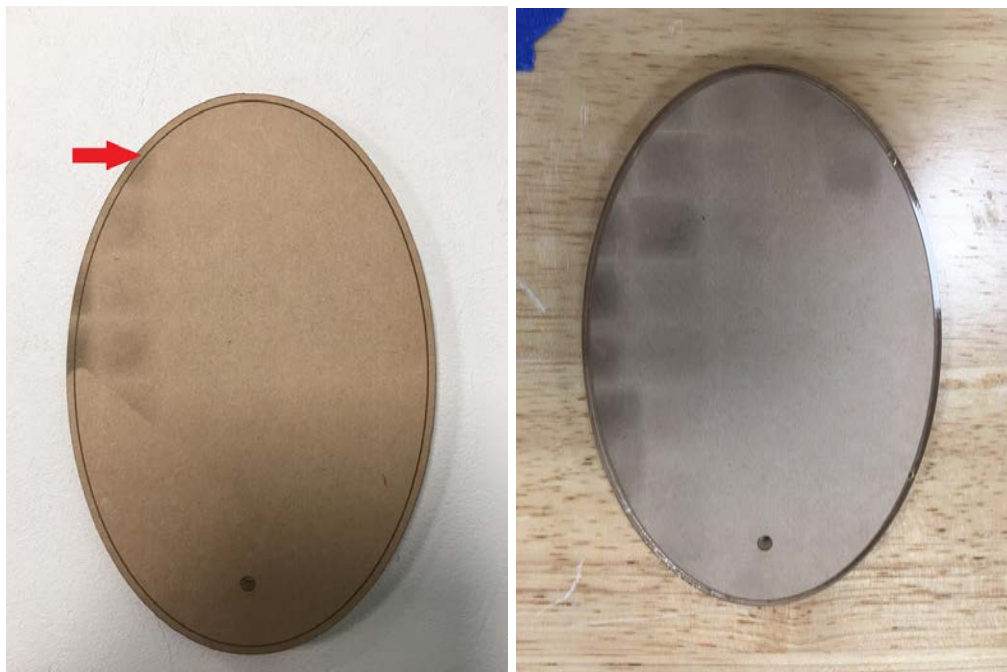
Removal of thin outer paper ellipse to reveal surface for adhesive spray
